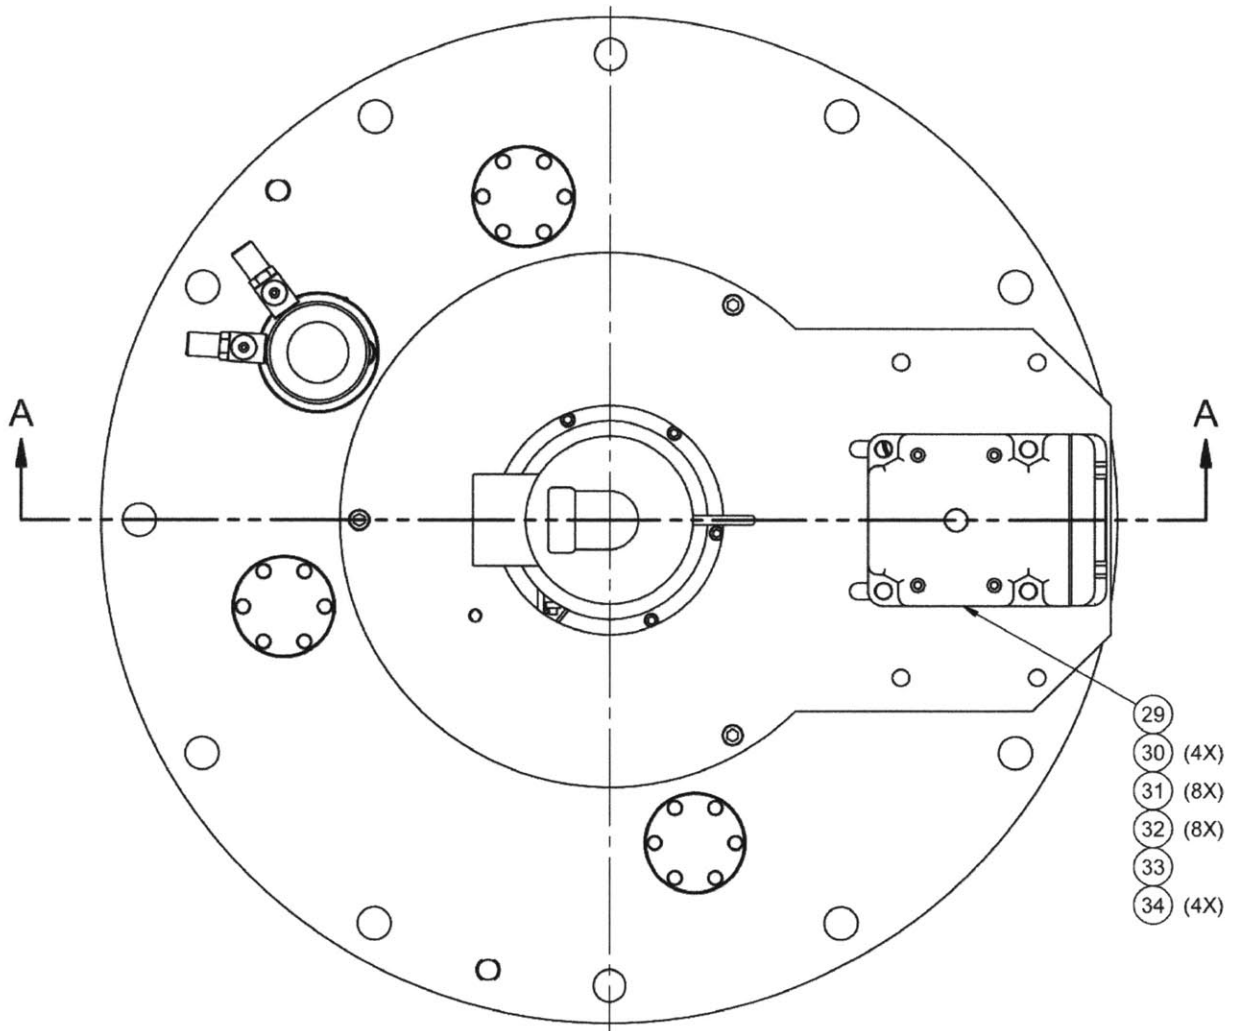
Engineering drawing of top flange of oCVD reactor chamber for stage—top view.
